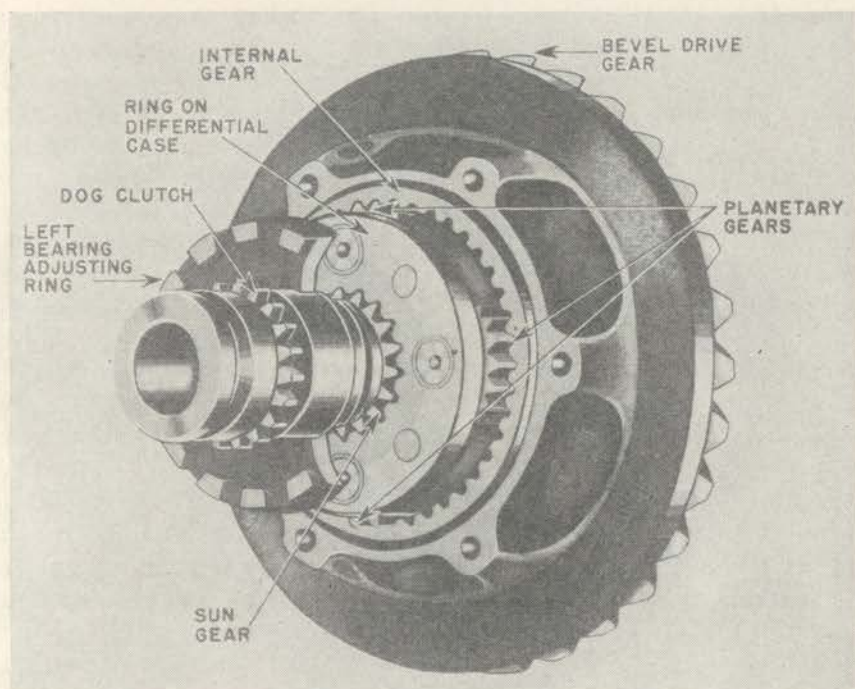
Position of gears for high ratio. (Planetary gears are locked and cannot revolve.)
